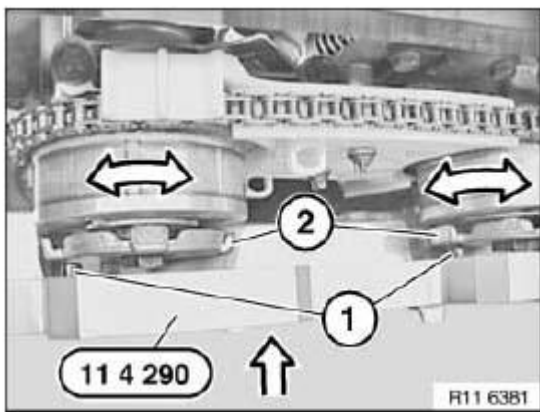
Identifying Special Tool (11 0 290), Sensor Gears And Locating Pins
